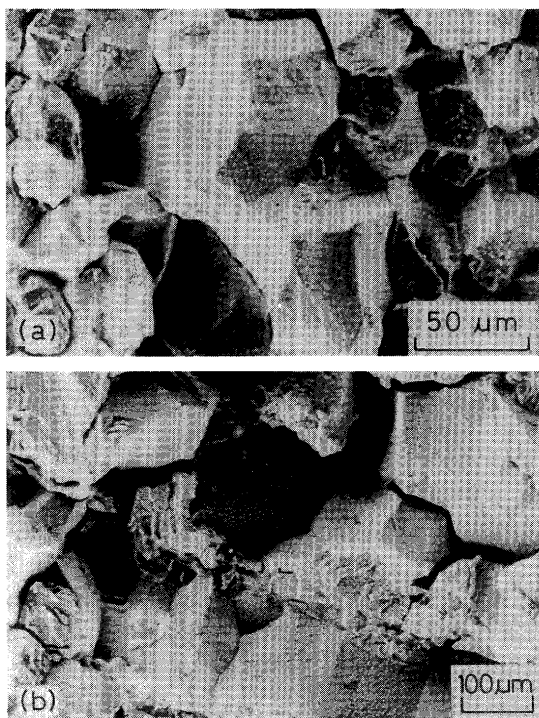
Fracture surfaces of sensitized specimens at  $8.35 \times 10^{-7} \text{ s}^{-1}$ .
